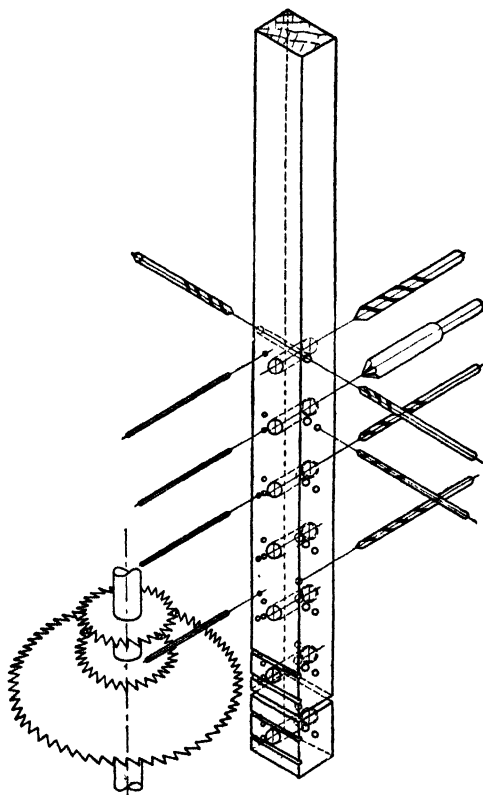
Succession of operations performed by spool-head machine. (Courtesy of the Western Electric Company.)
